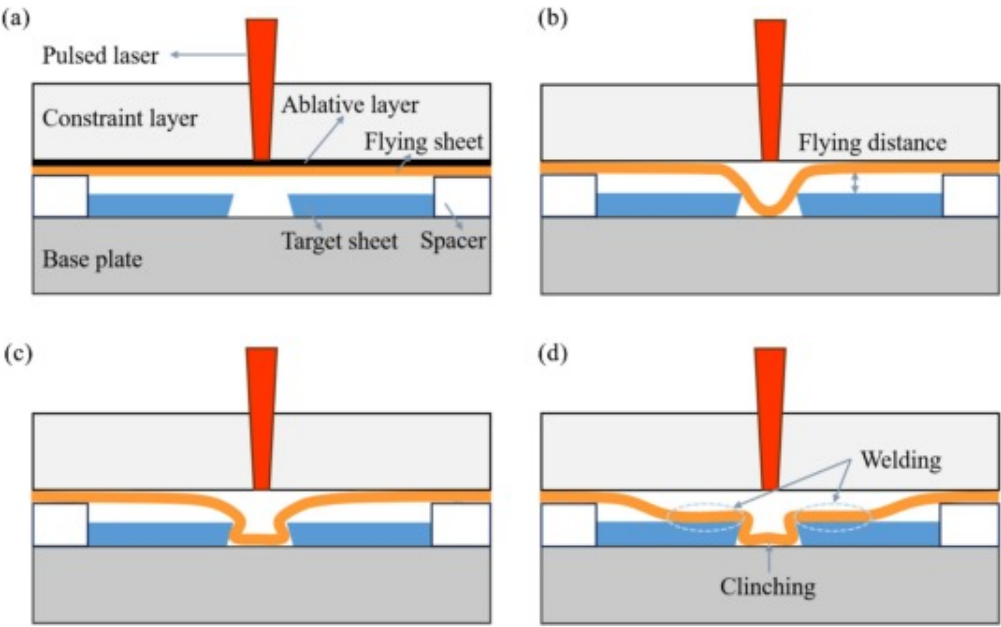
Schematic diagram of LSW (a) Components (b) Laser shock (c) Material jetting (d) Springback region and welded area [16].
